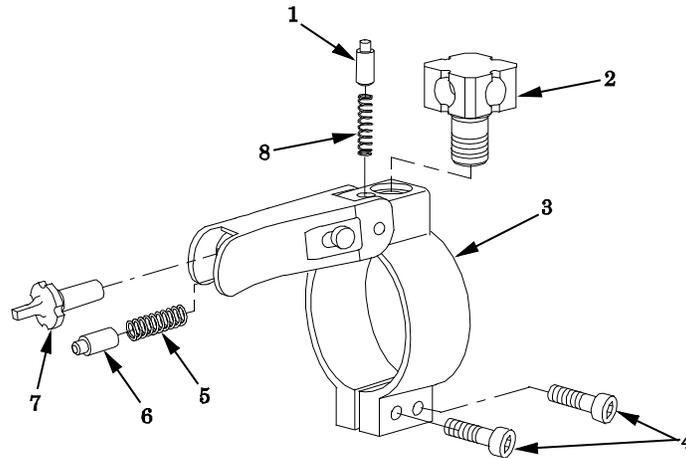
Disassembly/Assembly of Lower Bracket Assembly.
